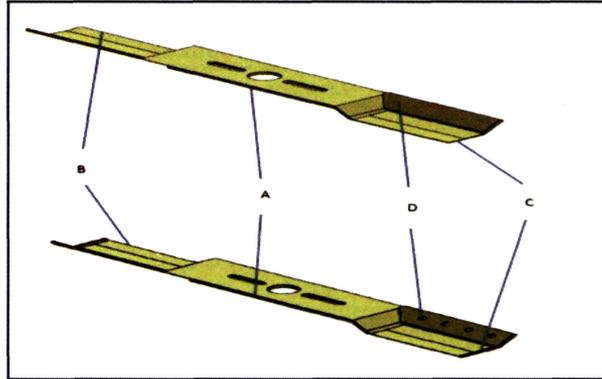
Geometrical comparison of initial CAD drawing and optimized design
